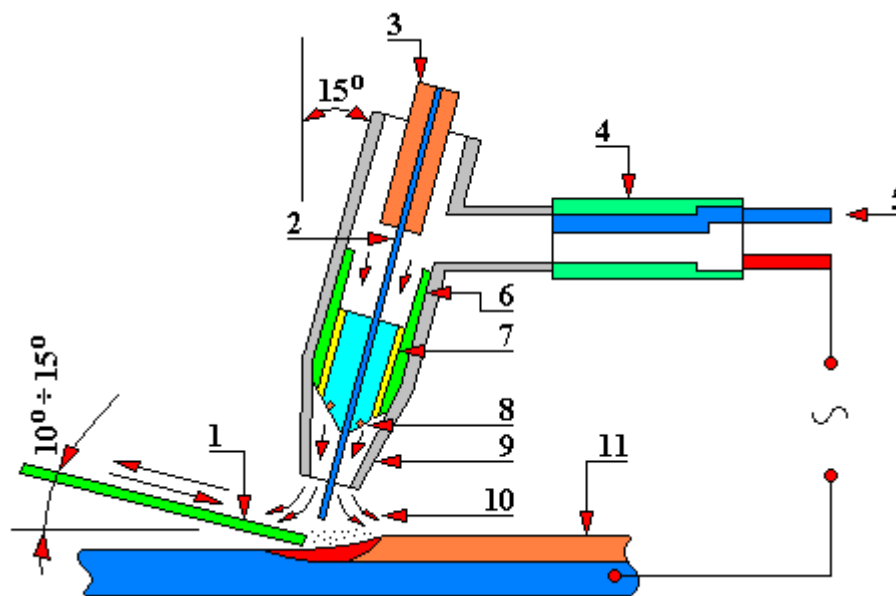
TIG welding diagram [239, 240, 241]
